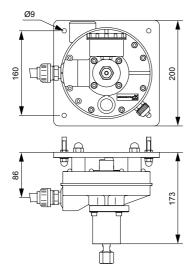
Vacuum regulator VGA-146 (wall mounting)
